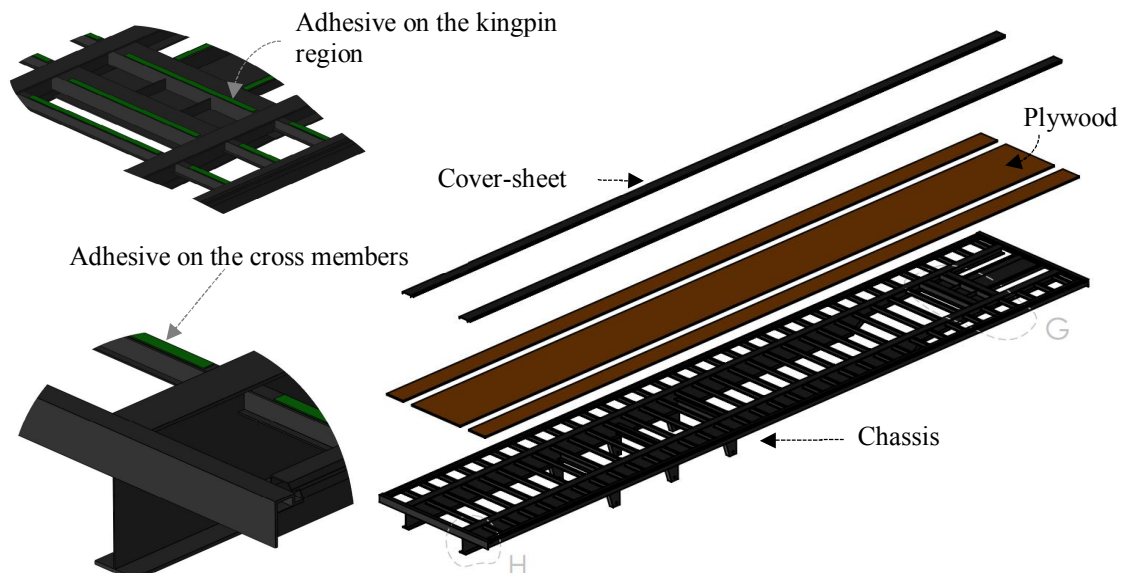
Exploded view of the semi-trailer chassis and its connection details.
